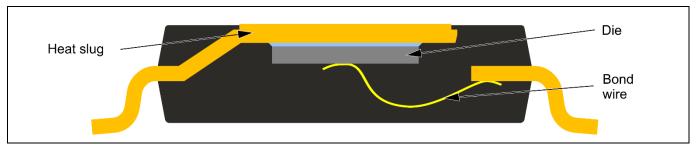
Schematic showing the inner setup of a top-side cooling package with positive stand-off.
